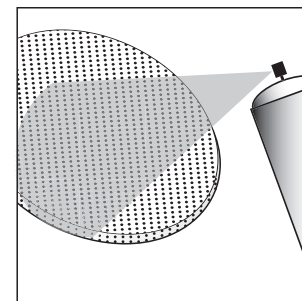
Paint the grille. Use thin coats of spray paint. Do not block grille holes with paint.
